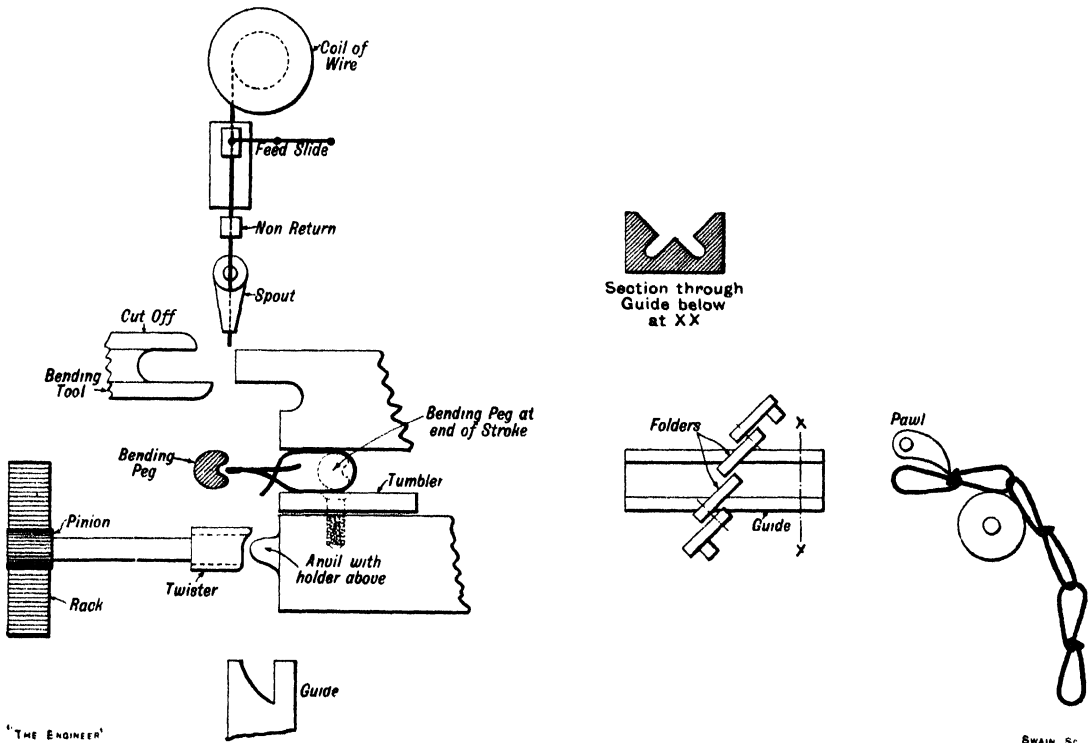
DIAGRAM OF KNOTTED CHAIN MACHINE.
